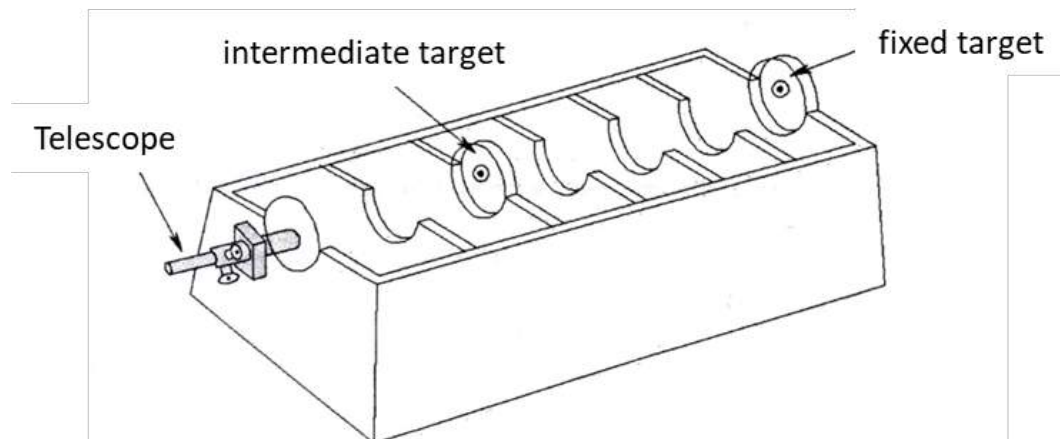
The method of checking the alignment of a series of holes in a machine part. [3]
